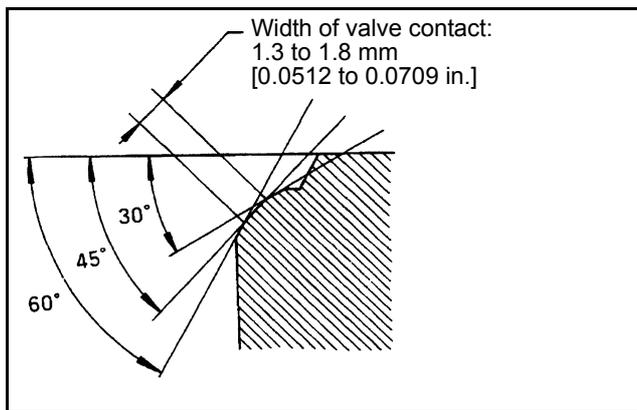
Refacing valve seat (Both inlet and exhaust valves)
